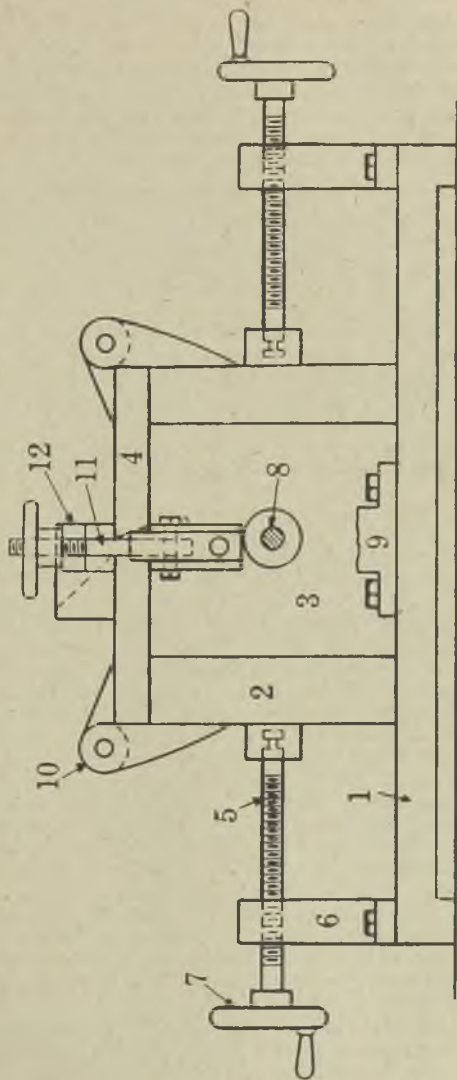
END VIEW OF PERMANENT MOULD SHOWN IN FIG. 8 (Székely)
